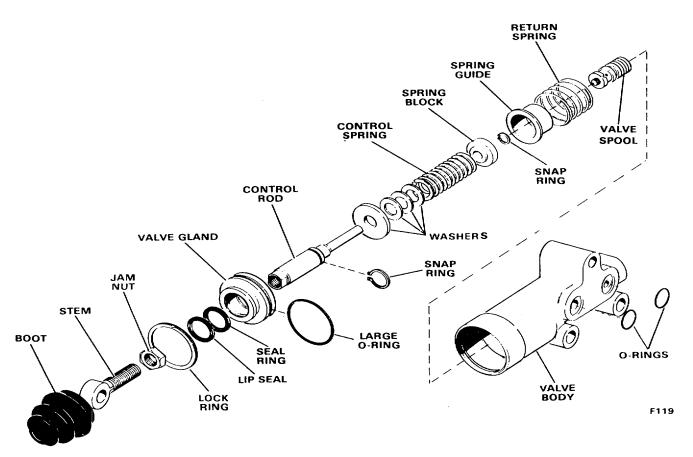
C-3. Control Valve (36Z316 & 36Z447)
